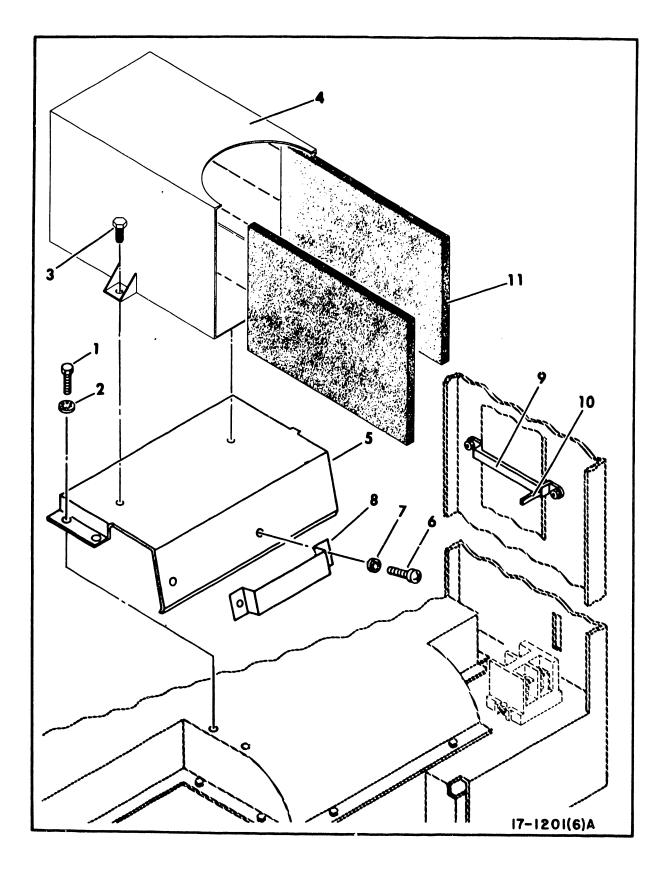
A-12. Frame & Air Assembly (Sheet 7)
